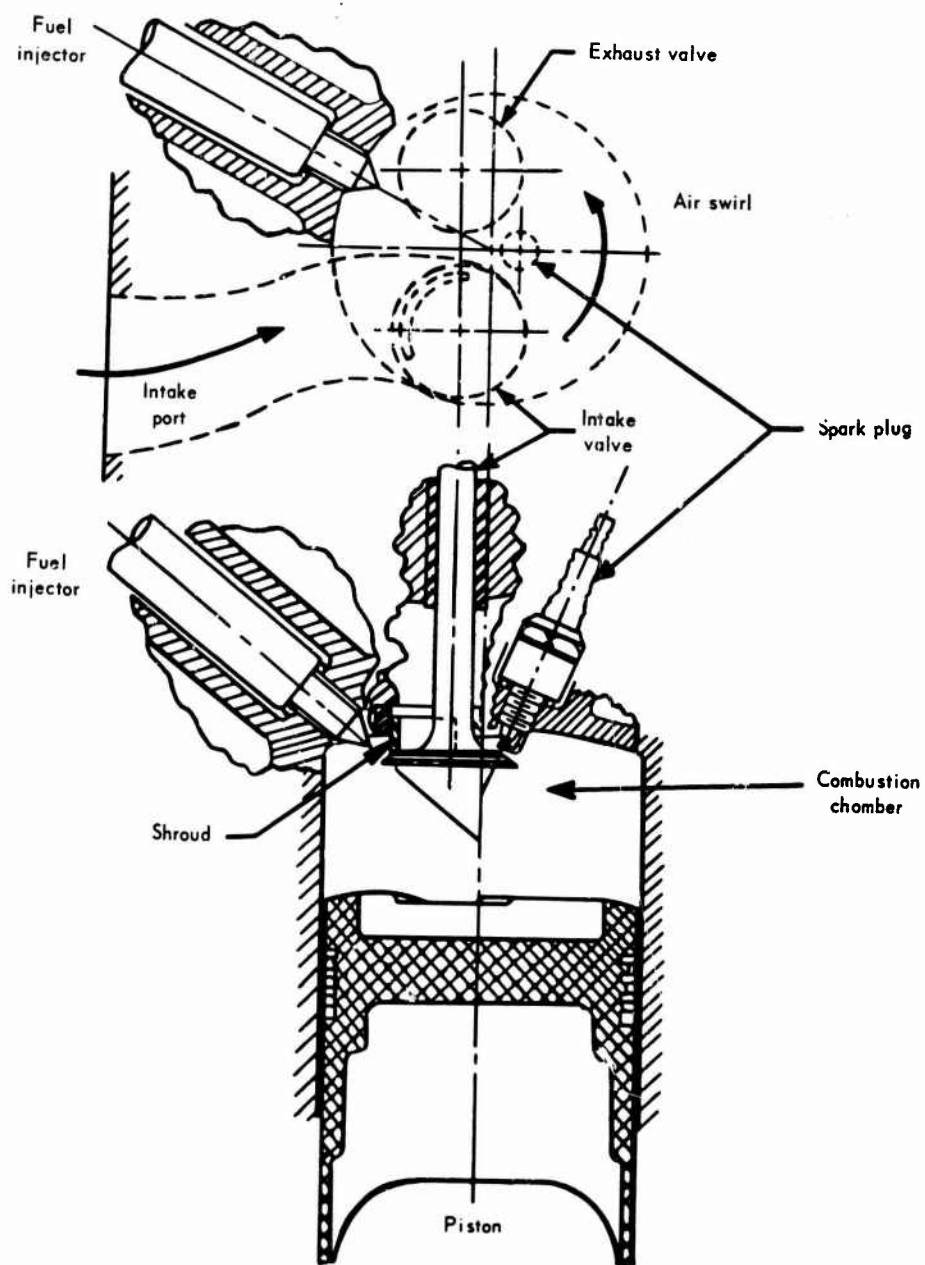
Swirl-Stratification System Using Shrouded Intake Valve
